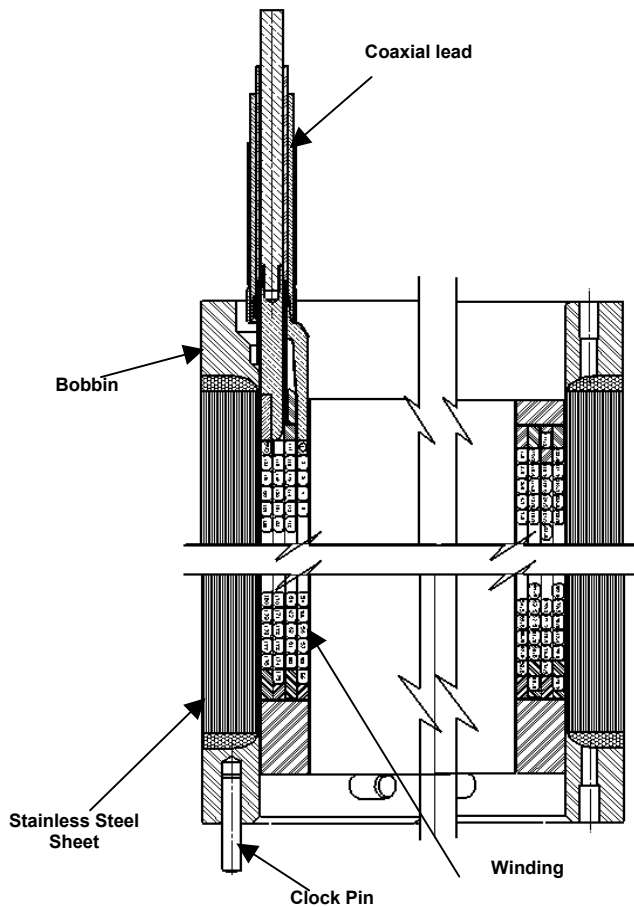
Cross-section of coil 1 showing winding, bobbin and stainless steel sheet wrap.
